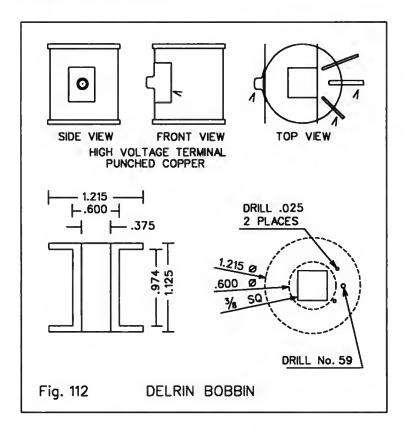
shows bobbin detail. The bobbins are machined from Delrin.
